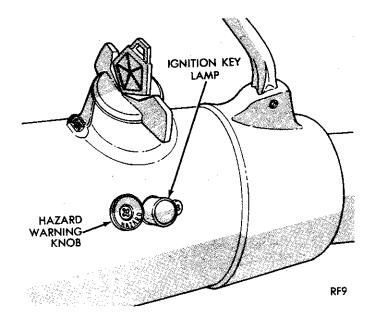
Ignition Key Lamp and Hazard Warning Knob.
